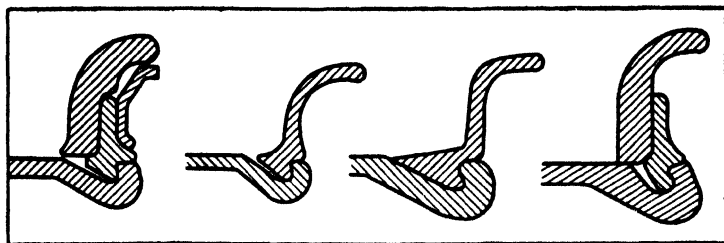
SHOWING VARIOUS METHODS OF SECURING REMOVABLE FLANGE.
